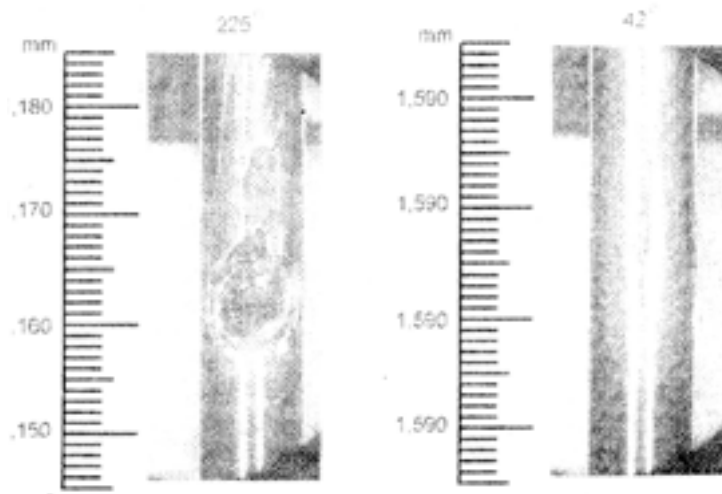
Visual Inspection of D103-K2 Fuel Rod.
